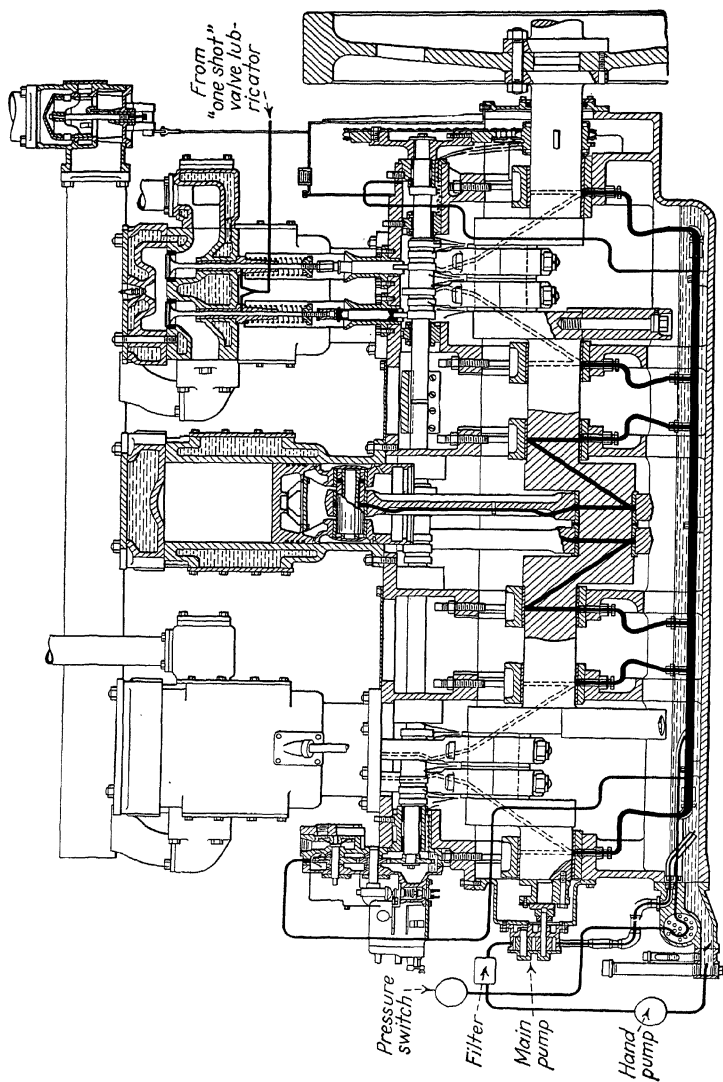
Six-cylinder, V-type gas engine equipped with force-feed circulation oiling to bearings and oil throw to cylinder walls.
